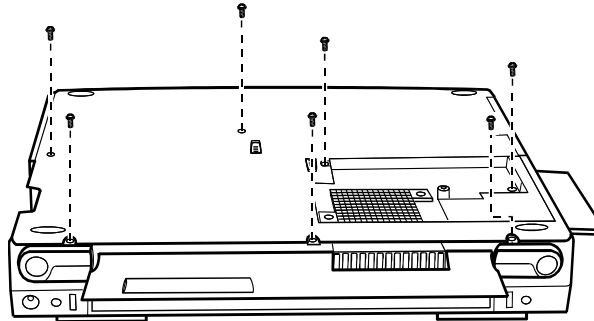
REMOVING THE BOTTOM SCREWS
